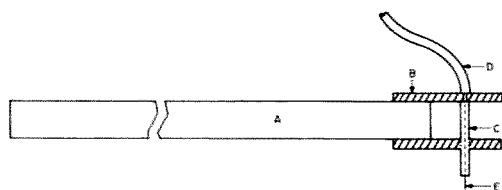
Stylus holder details. (A) $3\frac{1}{4}''$ piece of $1/4''$ steel rod stock (left over after the drum shaft has been cut to size). (B) $3/4''$ piece of $3/8''$ o.d. plastic tube stock. (C) $1/2''$ piece of $1/16''$ tube stock (stylus holder). (D) length of hookup wire soldered to one end of (C). (E) Wire stylus inserted into (C).
